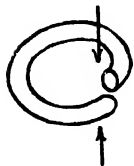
Bezel ready to be hard-soldered to a cast ring.
